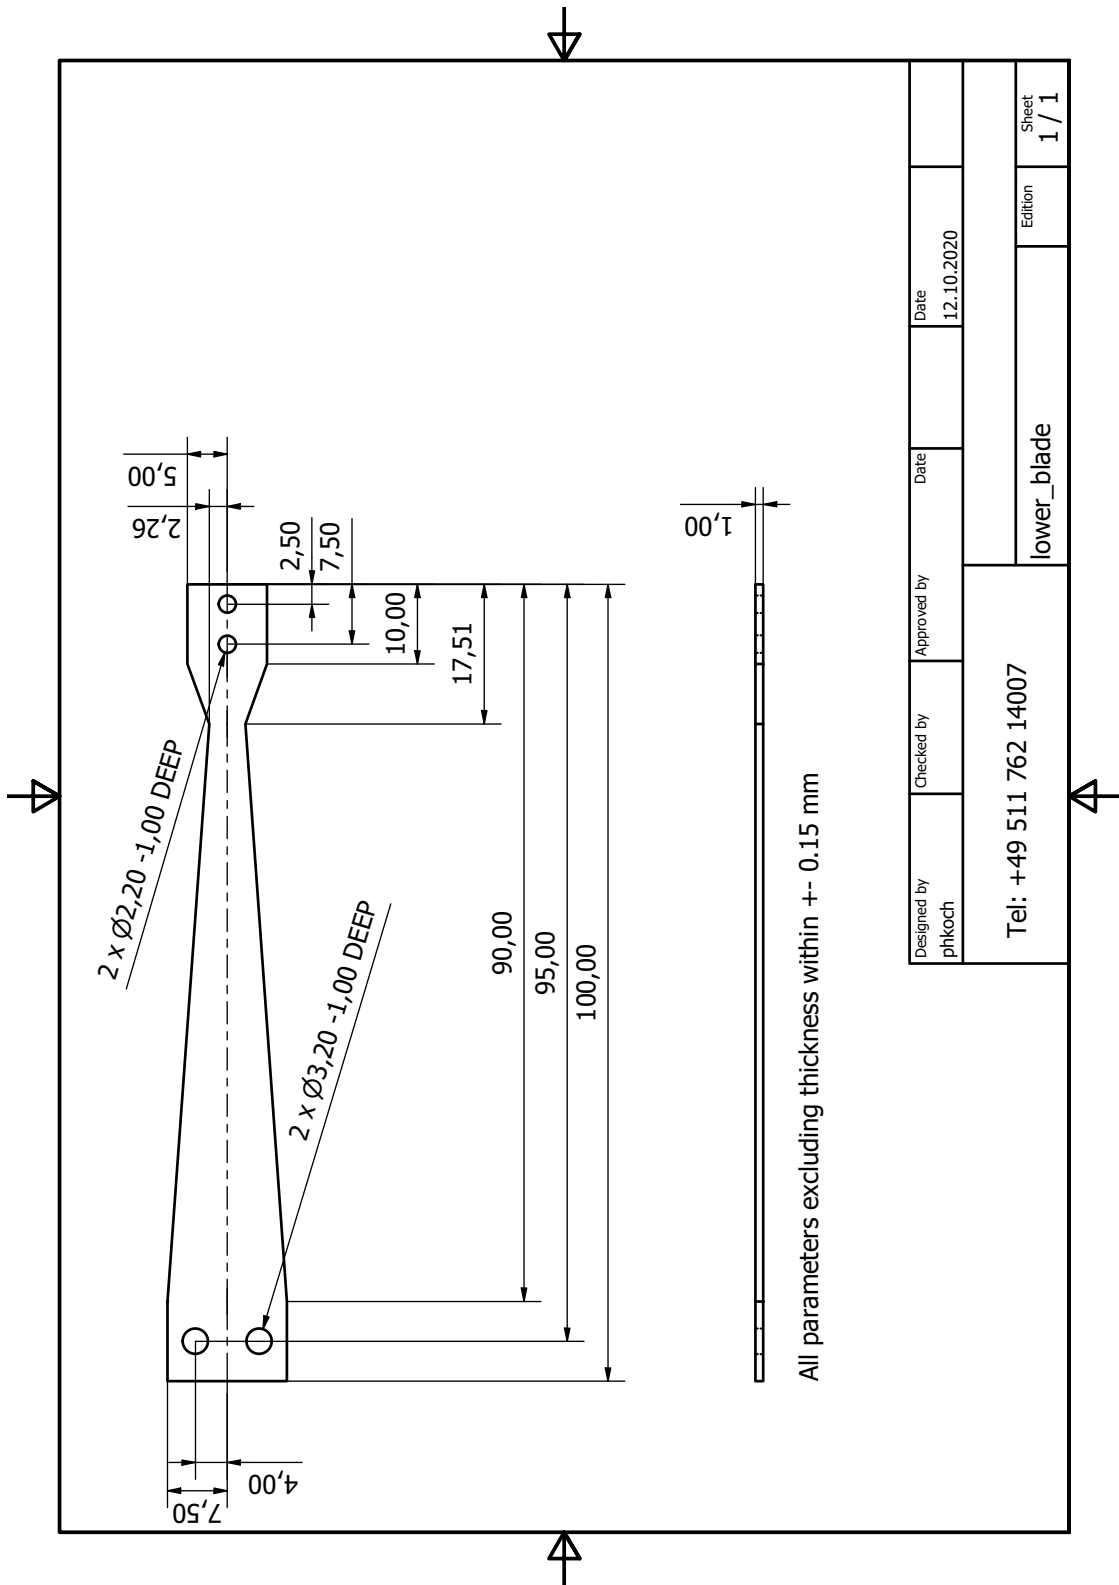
Drawing for the OMC suspension's lower blade spring.
